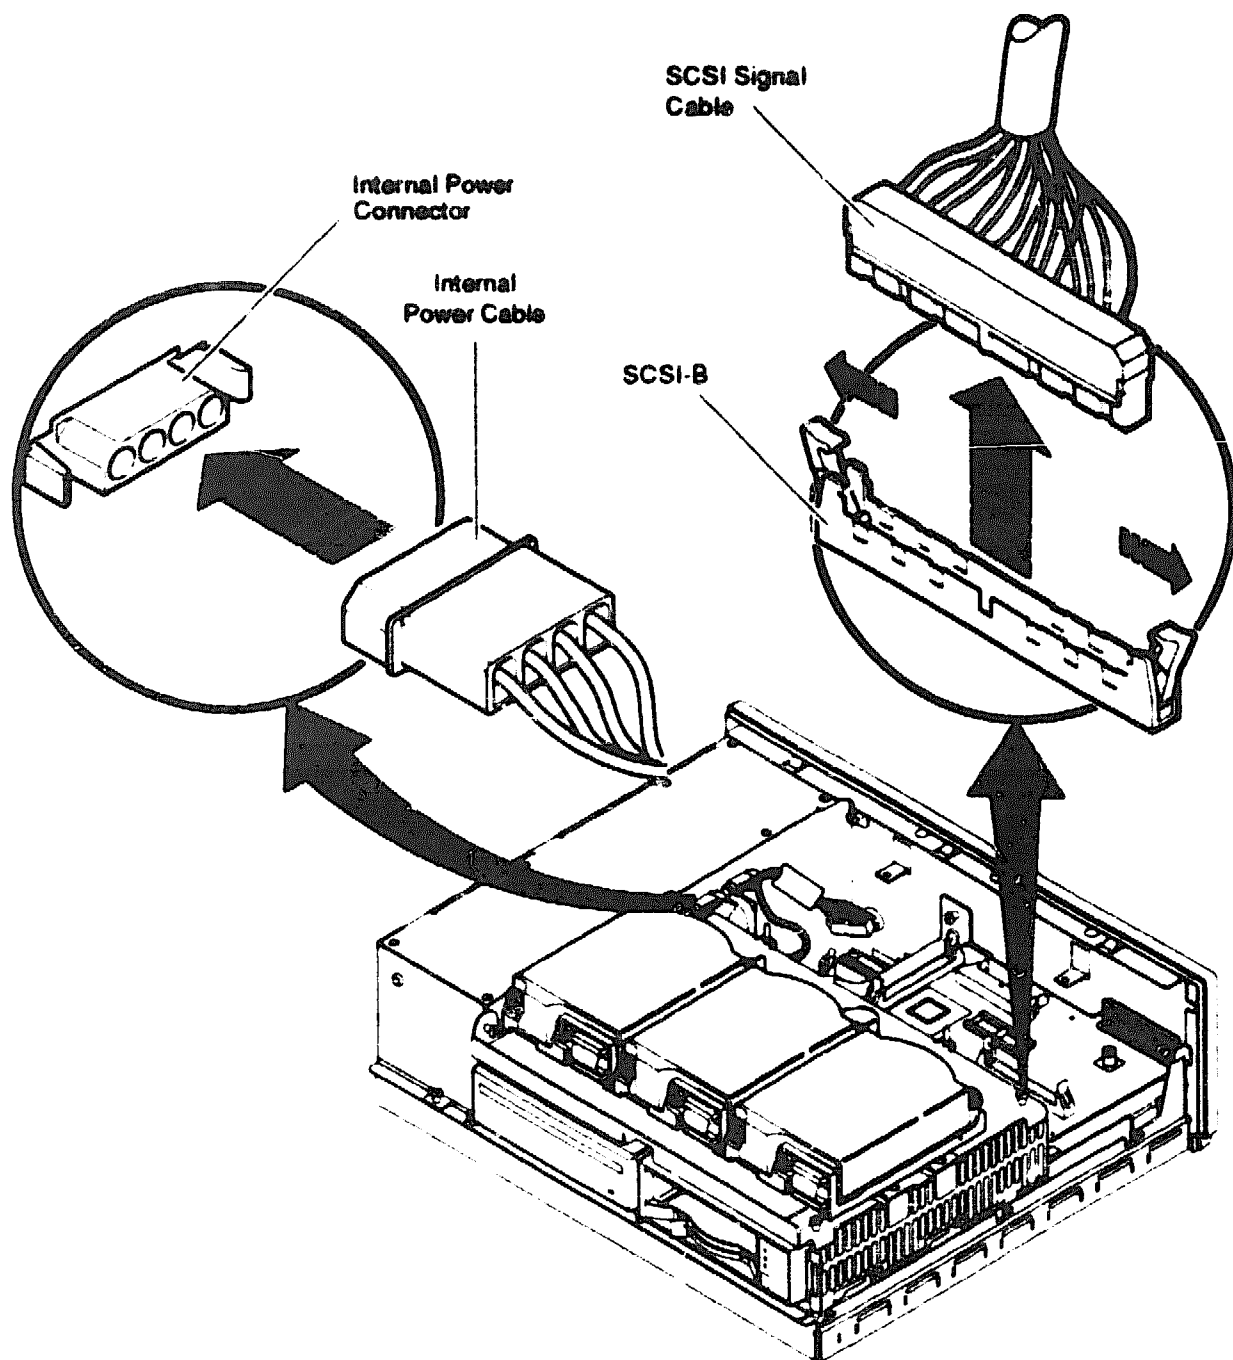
Disconnecting the SCSI Cable and the Power Cable from RZxx Hard Disk Drives
